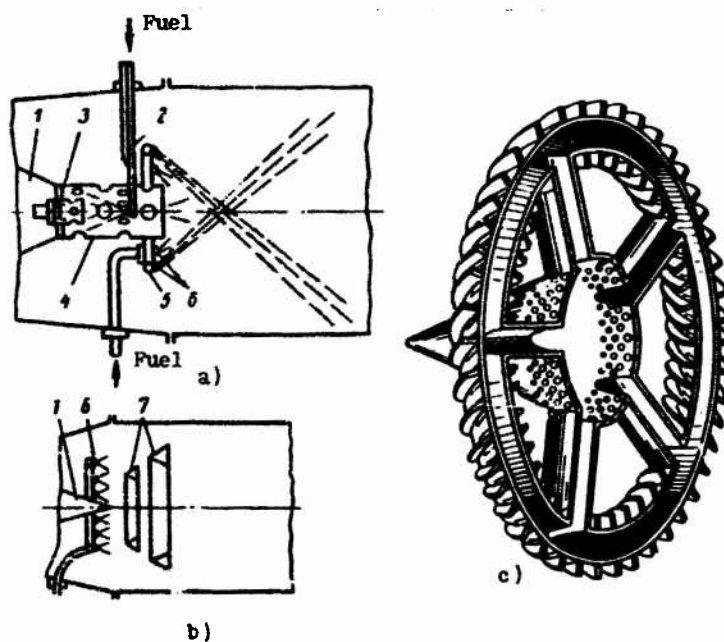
Diagrams of flame holders of afterburners: 1 - bullet; 2 - booster nozzle; 3 - electrical igniter; 4 - pre-combustion chamber; 5 - fuel manifold; 6 - main injectors; 7 - flame holder.
